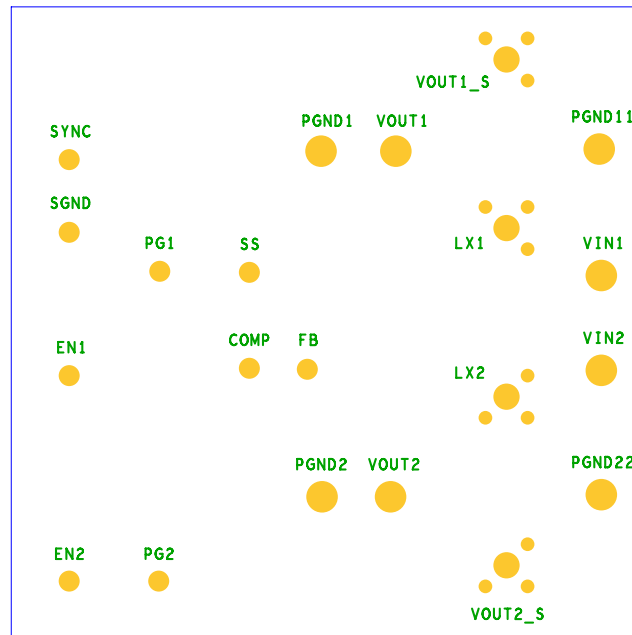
BOTTOM COMPONENTS (MIRROR)
